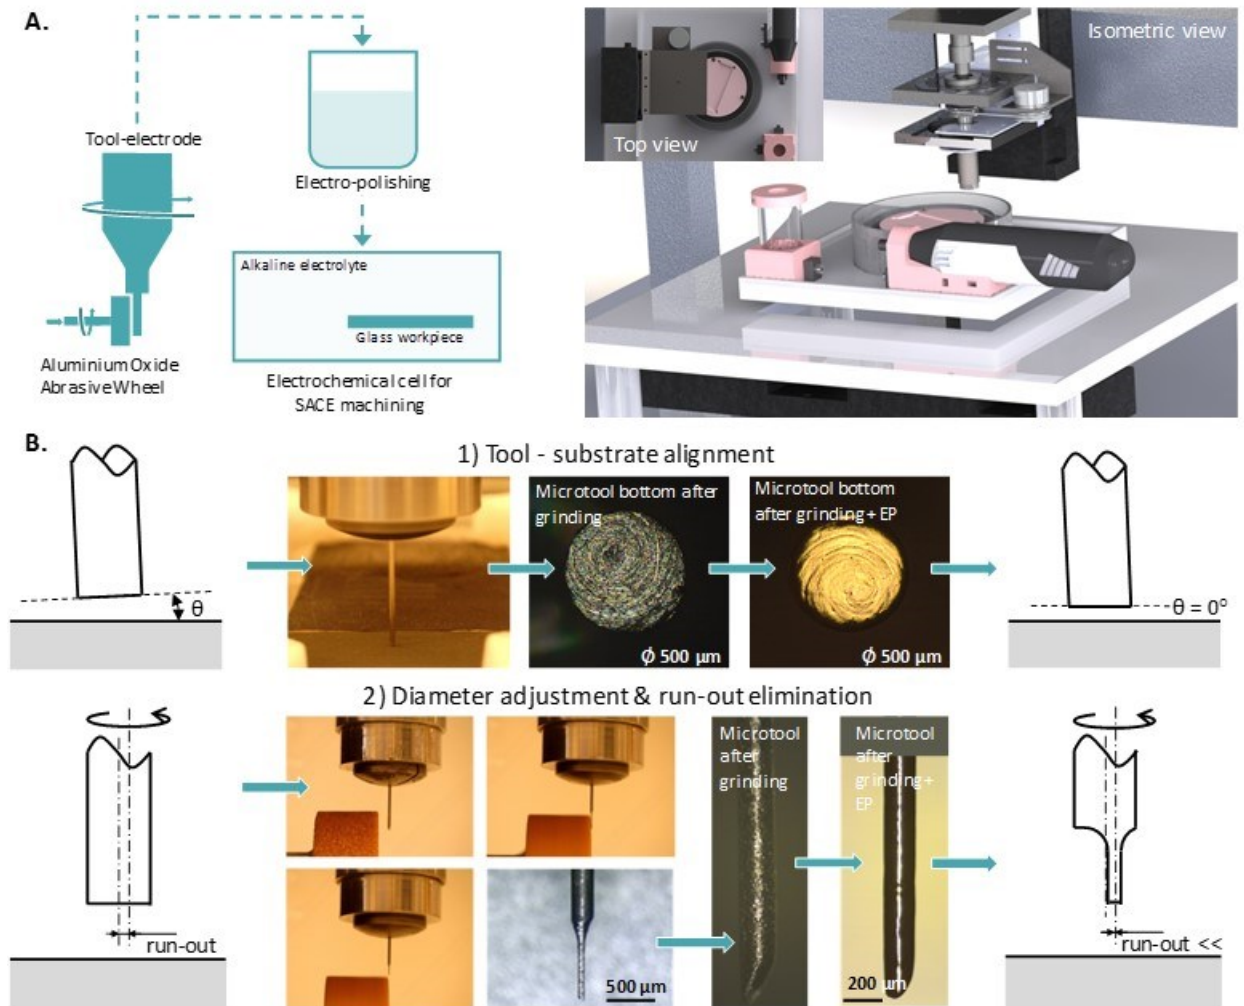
A. In situ microtool fabrication setup for glass micro-machining by SACE: tool fabrication starts with grinding followed by electro-polishing. B. 1) Misalignment correction of tool – substrate 2) Tool diameter reduction and run-out elimination.
